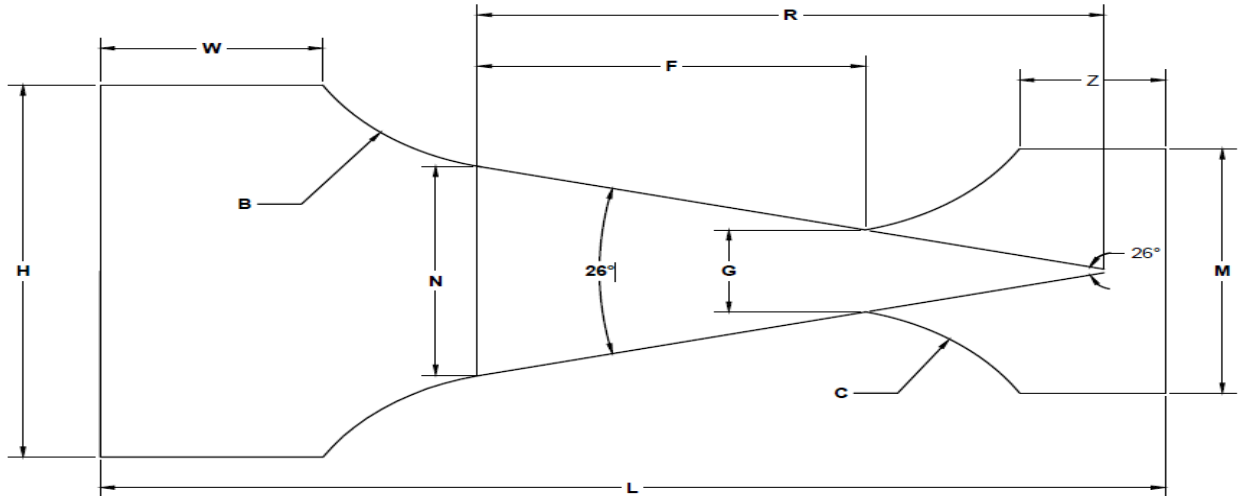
Sketch of the mini fatigue test specimen (all dimensions are in millimetres) [3].
